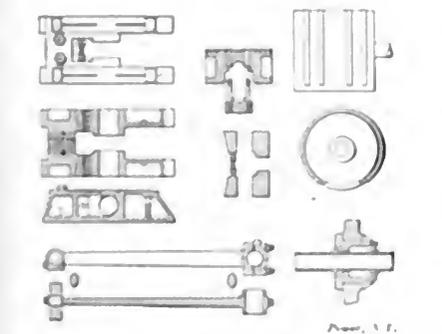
PISTON, CROSSHEAD, ROD AND BOLT SLEEVE
